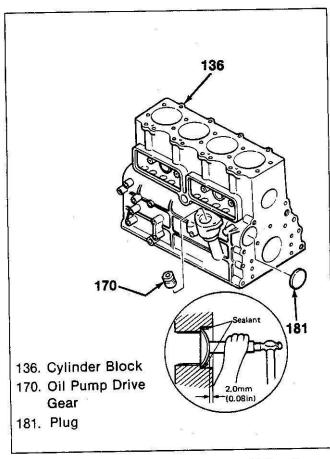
Installing the Oil Pump Drive Gear and Plug
